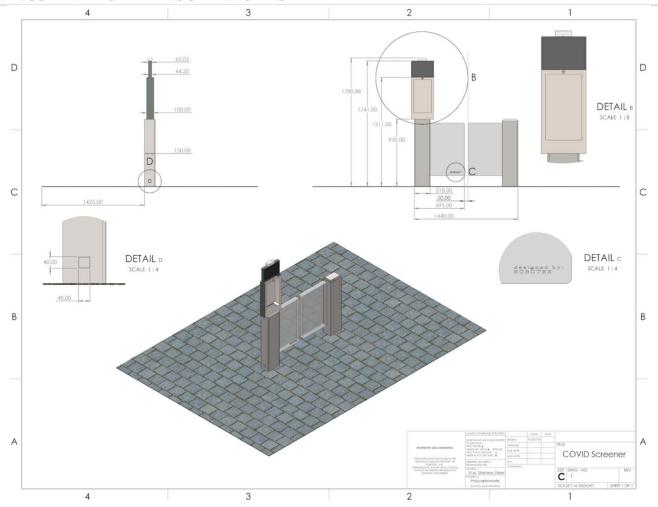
Detailed Design Drawing Highlighting Dimensions (in mm) of Main Body of the Device
